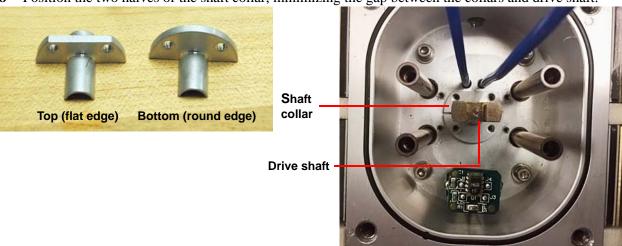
Left: Two halves of the shaft collar; Right: Shaft collar in place.
